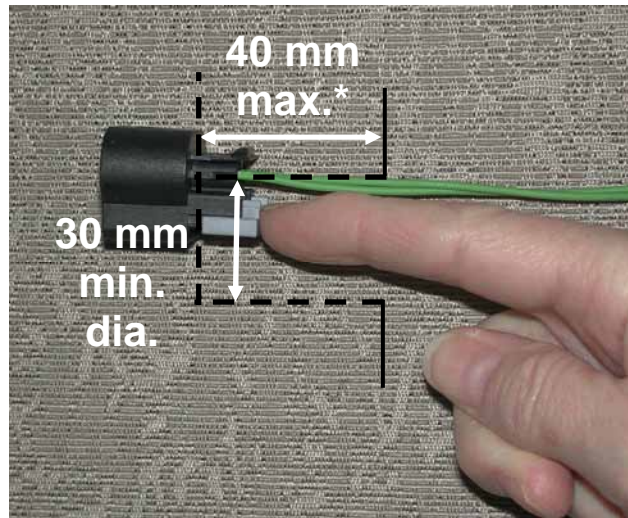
ONE FINGER/THUMB PUSH CLEARANCE (SIDE VIEW)
